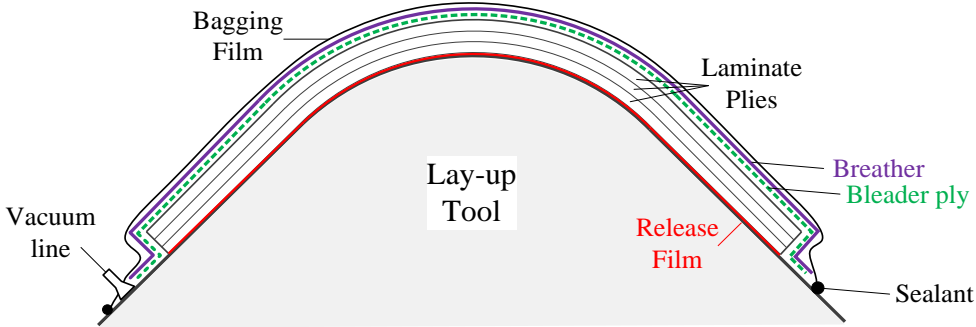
Manufacturing assembly of L-shaped laminate to be cured in an autoclave.
